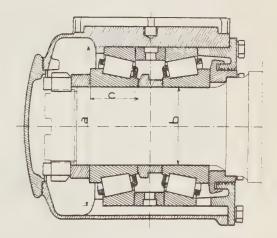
Timken taper roller bearing box of the outside type with two bearings each with a single row of rollers shrunk onto the journal.
